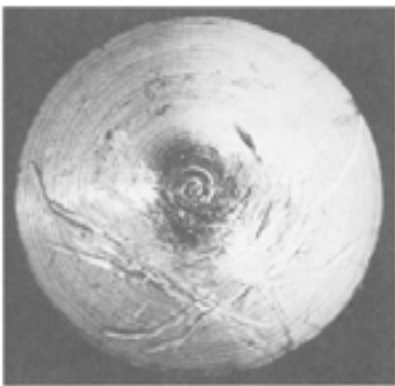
Yale pin tumbler from a lock cylinder that had been picked with a hook pick. Pin diameter is 2.92 mm (0.115 in.).
